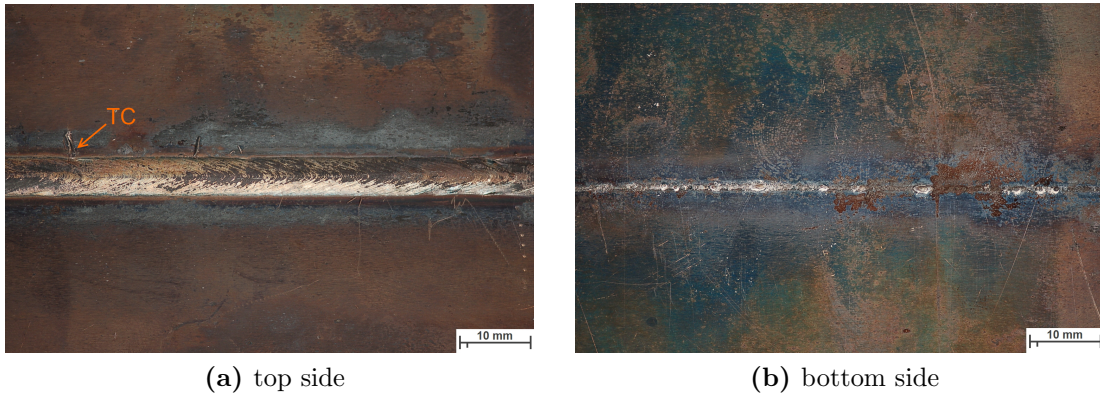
Weld test plate with final optimised weld parameter. The orange arrow indicate the position of the thermocouple closest to the fusion line.
